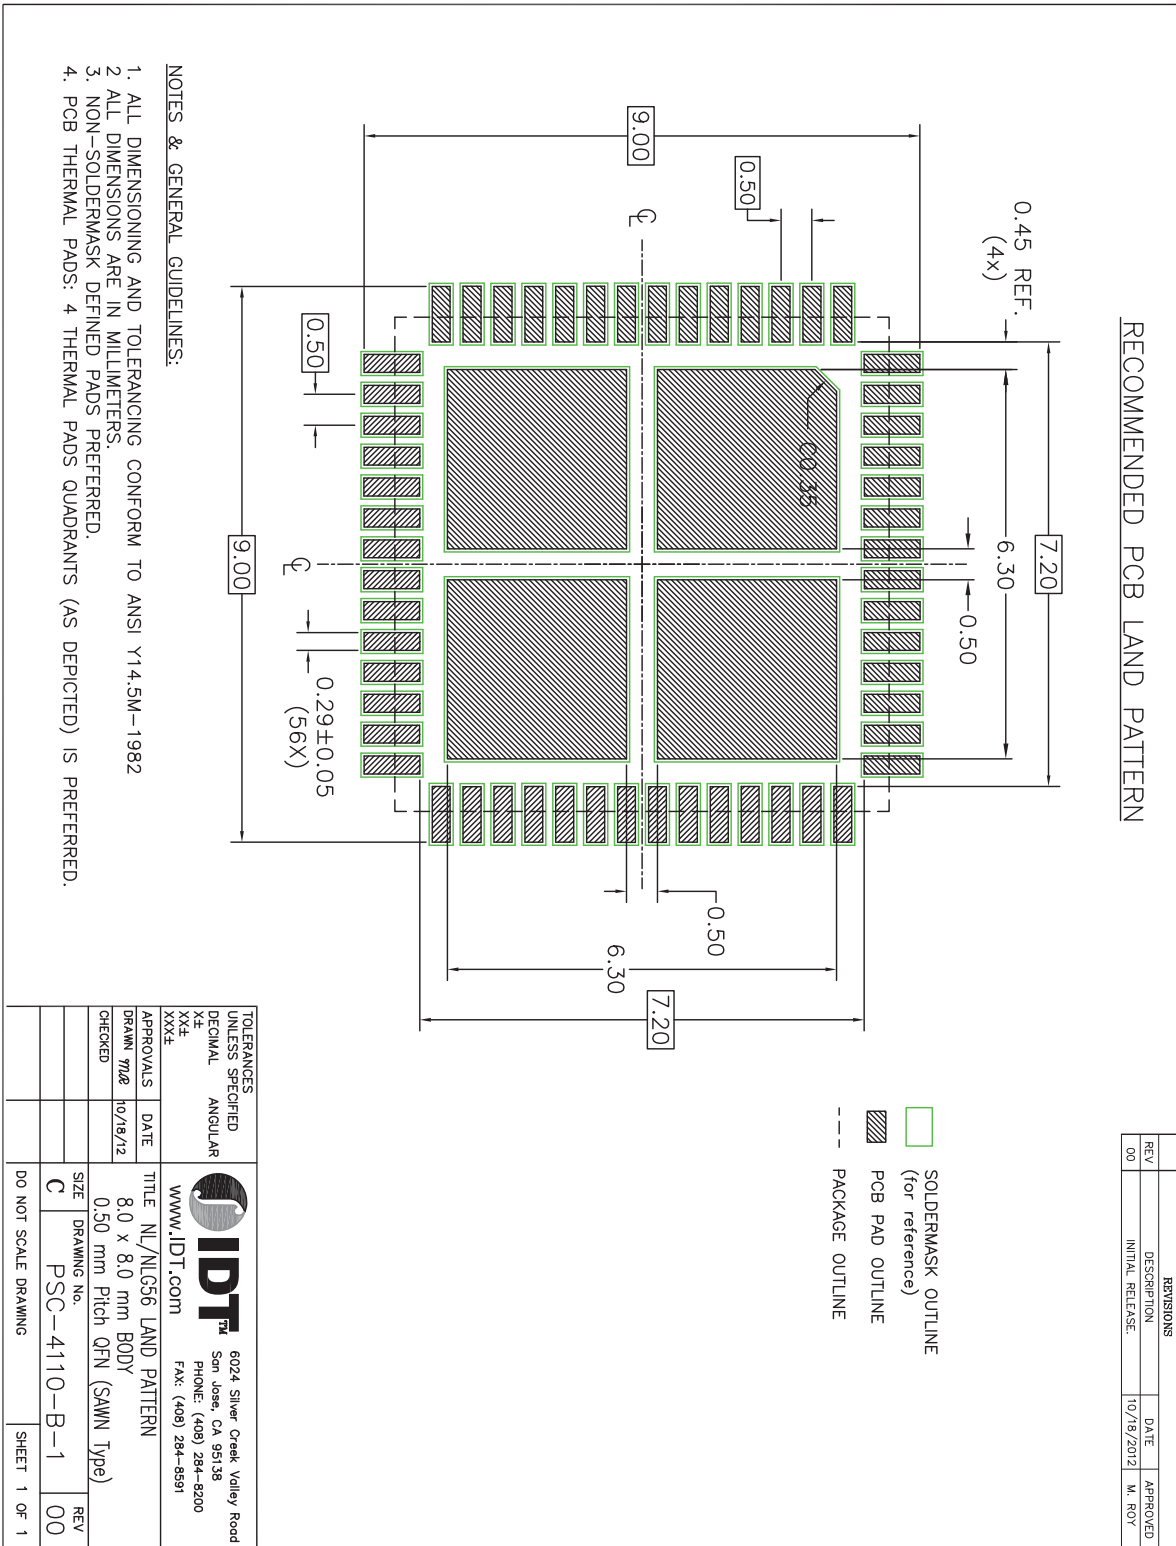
Footprint information for reflow soldering of VFQFP-N 56 (PSC-4110) package
